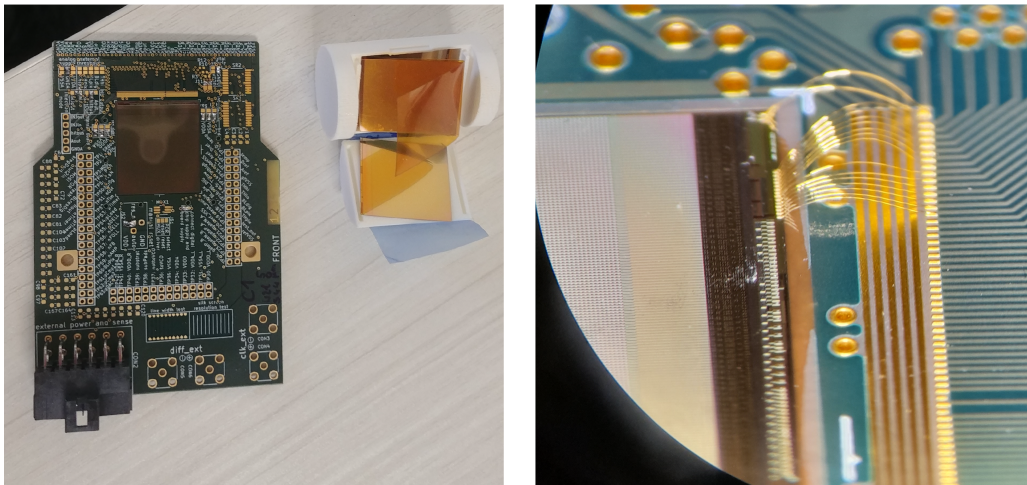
Left: MuPix10 Prototype sensors. One is bonded to a prototyping board. Right: Partially bonded sensor
